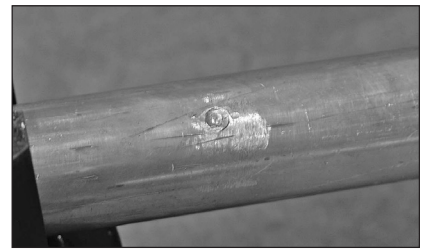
Peen edge of filler hole over top surface of plug.
